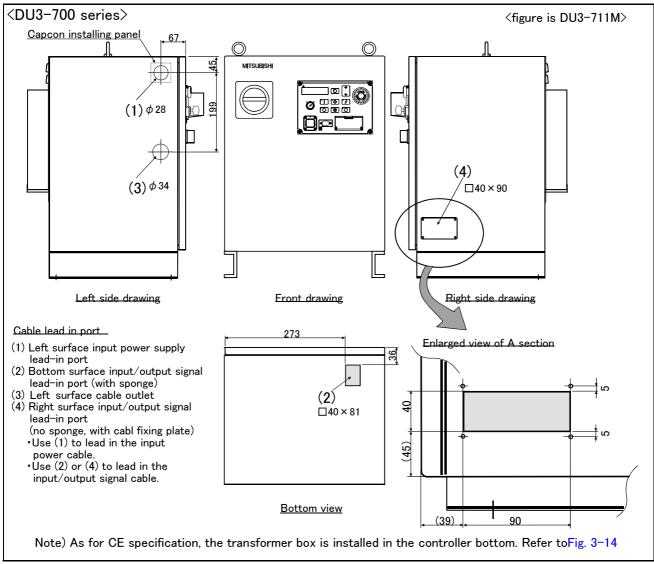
Cable lead-in and dimension of the controller (DU3-700 Series)
